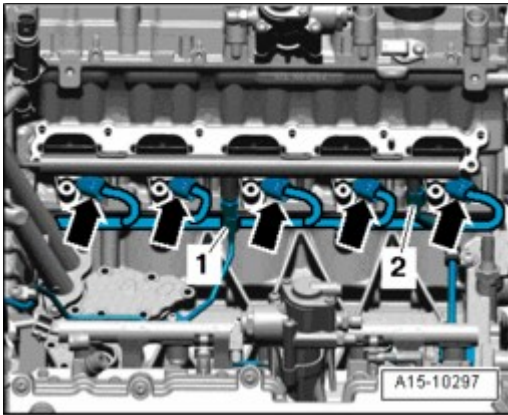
Identifying Fuel Injectors Electrical Connectors & High Pressure Line
